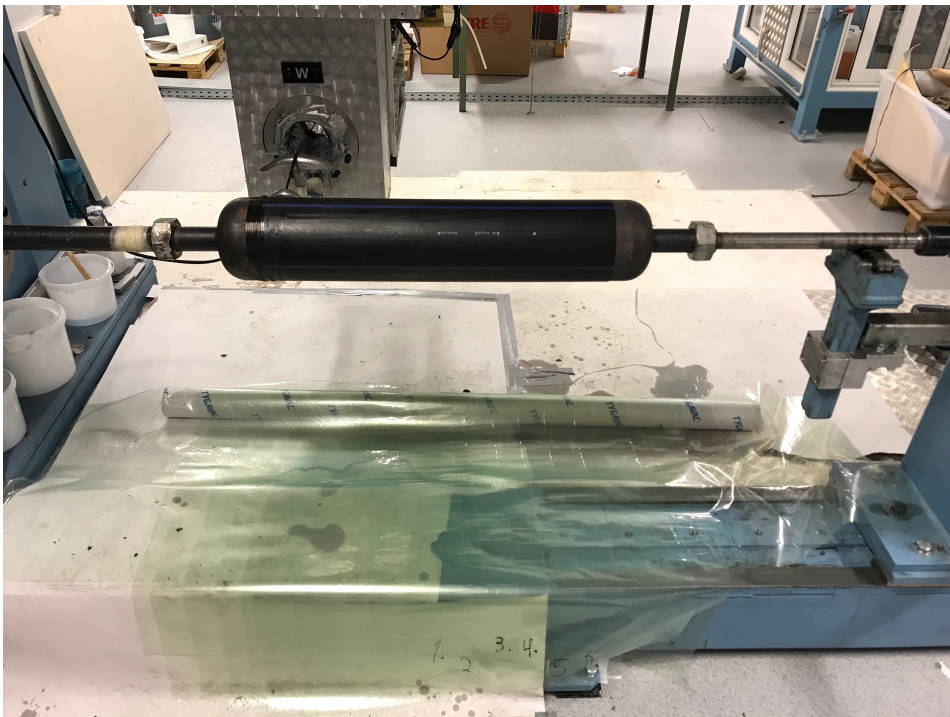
Sheets under the winding eye and spreader, removed after each ring finished winding.
